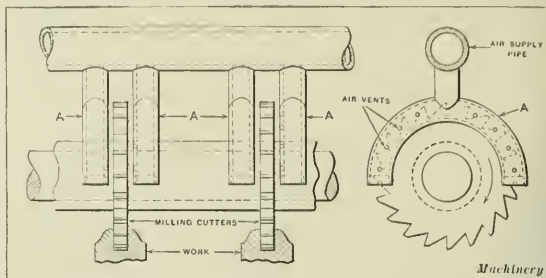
Method of cooling Milling Cutters with Compressed Air
